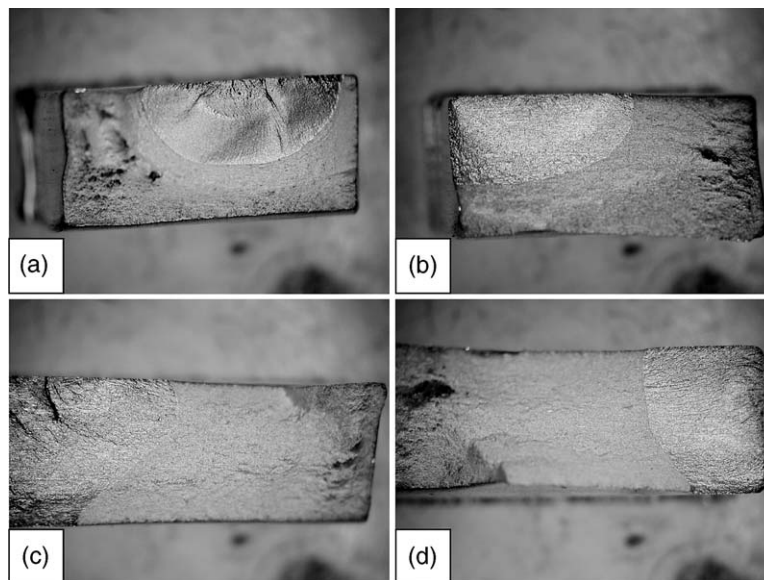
Representative macrographs of the fracture surfaces of polished specimens: (a) 80, (b) 95, (c) 130, (d) 200 mm/min. Crack initiation sites are on the upper surface for (a)–(c), and at the right edge of the specimen in (d).
